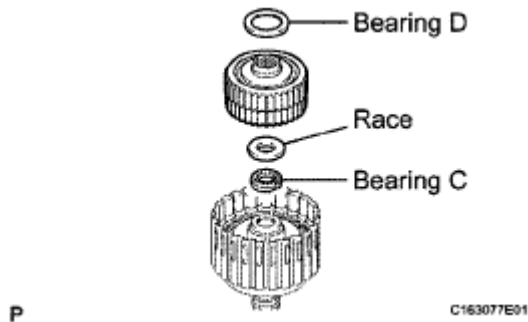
Identifying Thrust Needle Roller Bearings, Thrust Bearing Race And Coast Clutch Hub
